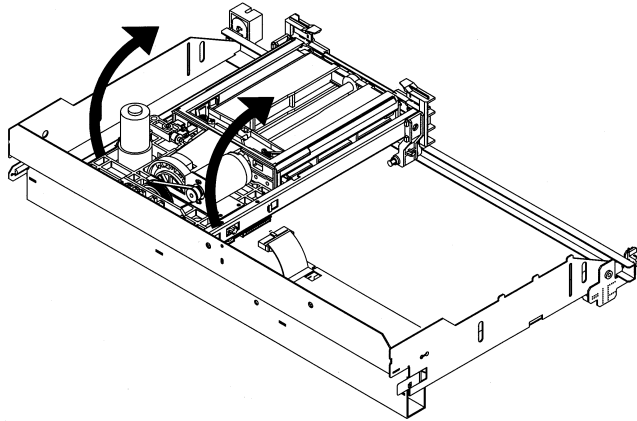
Removing the Translate Frame Capture Bracket
